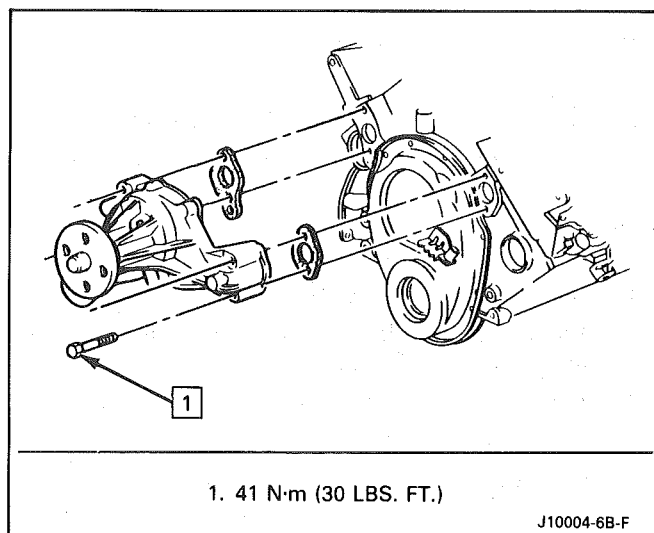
Water Pump Mounting — V.I.N. E, F and 8
